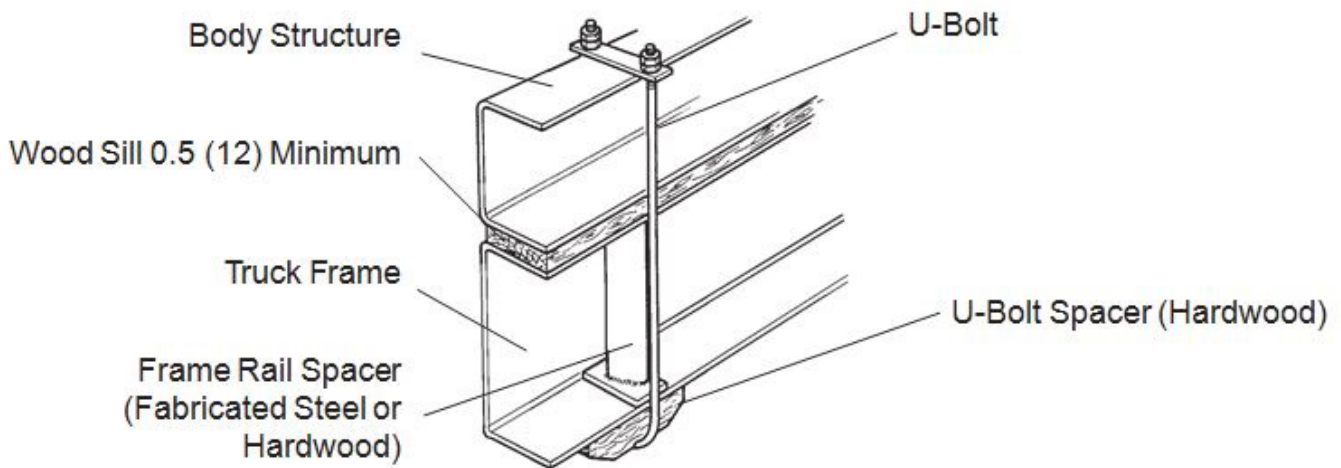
Acceptable U-Bolt Mounting with Wood and Fabricated Spacers
